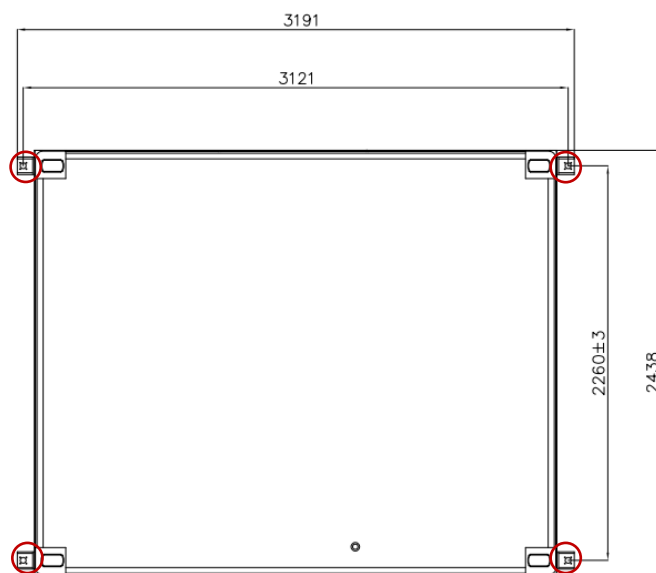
Cabinet fixation guide bottom view Unit: mm
